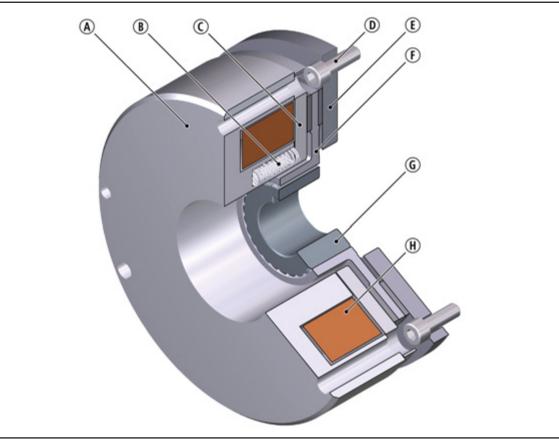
Design of the INTORQ BFK457 spring-applied brake: Compact module (complete stator) + rotor + flange
